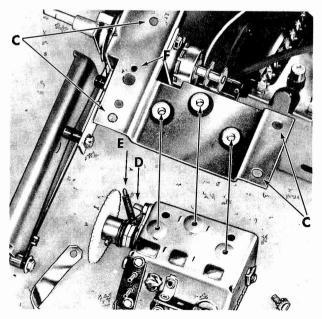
View Of UHF Tuner Shown Removed From Chassis.
